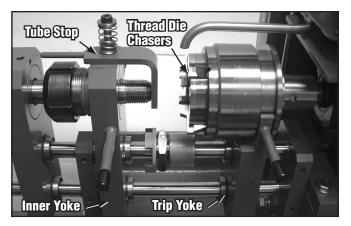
Positioning tube against tube stop. Die head is shown in the extreme open position
